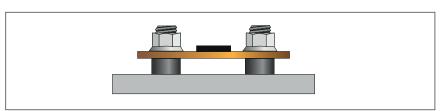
HV BM 1.2, power cables HV- (≤35 mm²), nuts mounted on the threaded bolts
